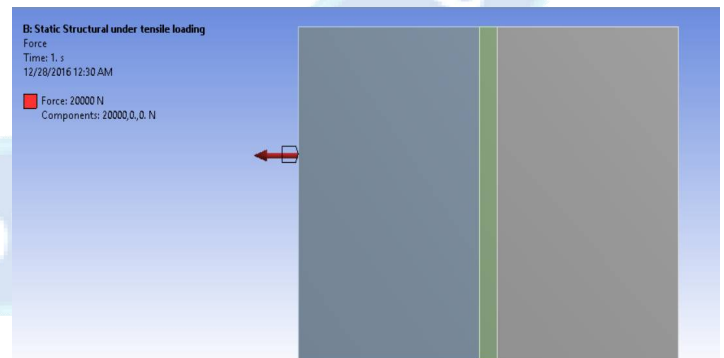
Application of tensile load of 20KN on Butt weld joint
